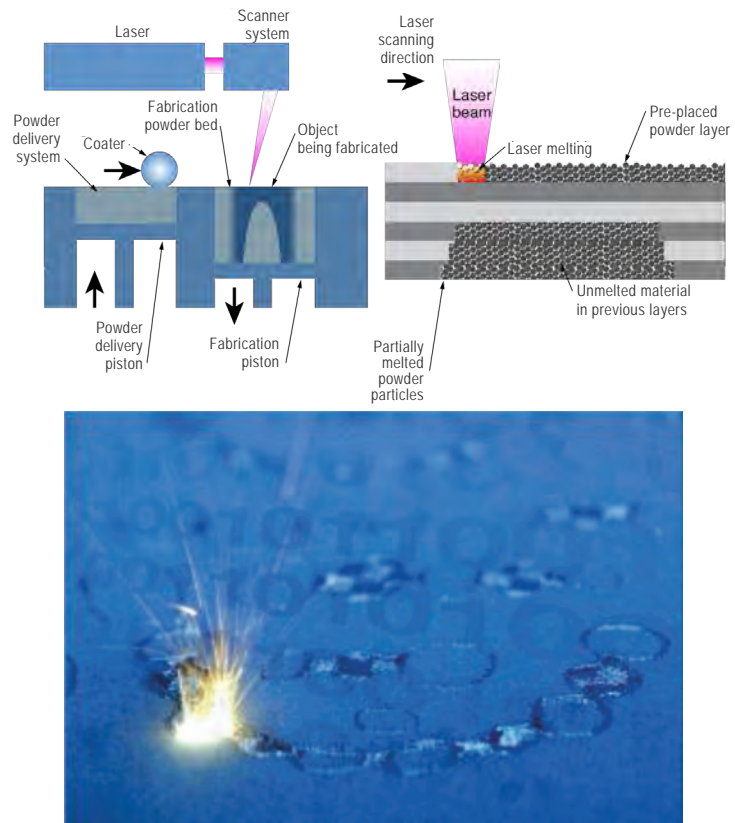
Laser powder bed fusion metal additive manufacturing. In metal powder bed fusion, a layer of metal powder is spread on a powder bed and melted using a laser. When the layer is complete, the delivery piston moves up, and the coater is used to spread the next layer. This process is repeated hundreds to thousands of times until a complete part is fabricated.
